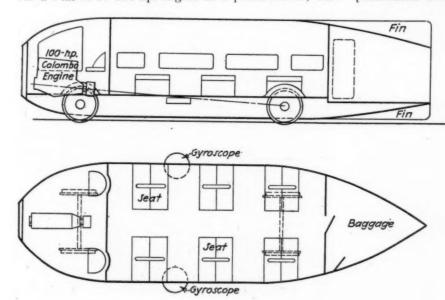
Elevation and Plan Drawings of the Proposed Motor Rail Car Which, It Is Contemplated, Will Have 100 hp.
